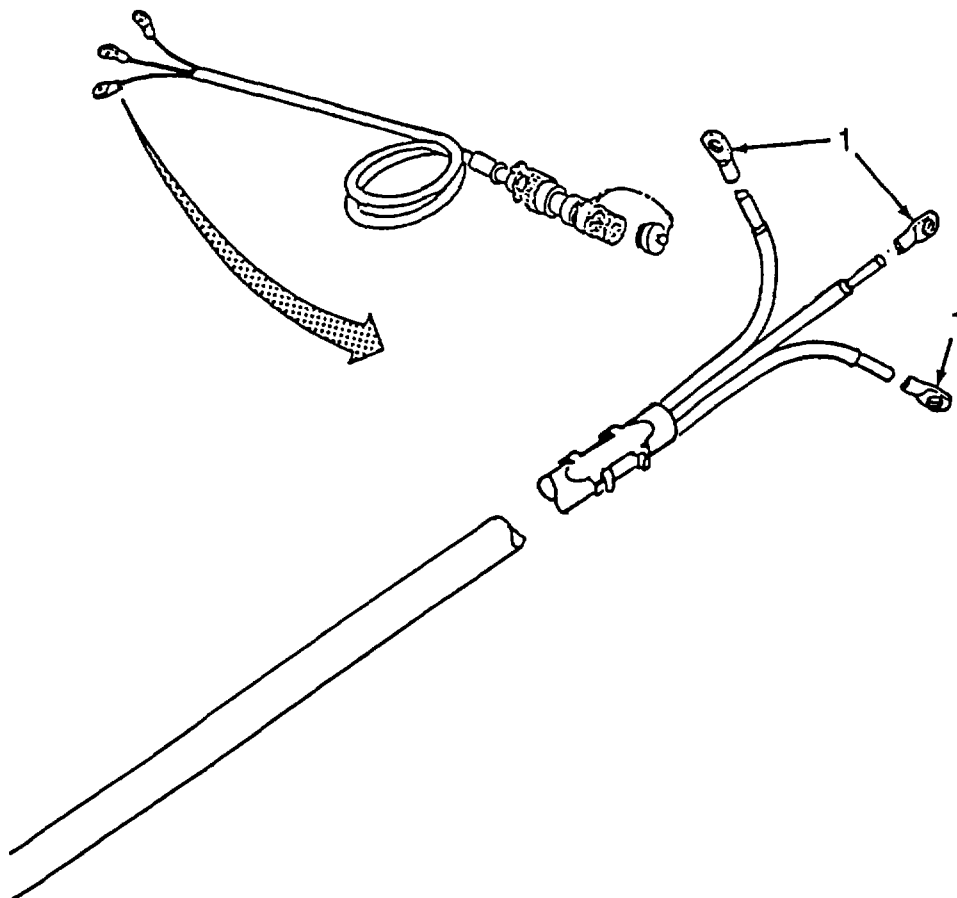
Remote Control Thermostat Repair (Sheet 3 of 3)
